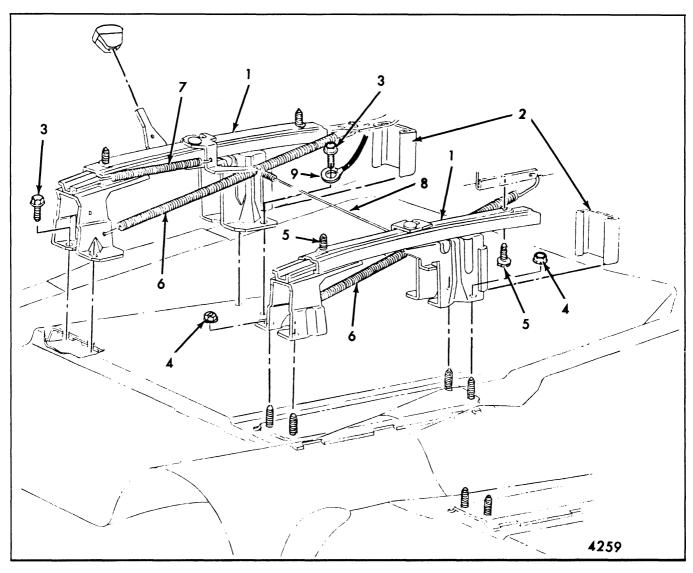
, 50-50 and 40-40 Front Seat Manual Adjusters (60-40 Passenger Side Shown-Driver Side Typical)- 50-50 and 40-40 Adjusters Typical
